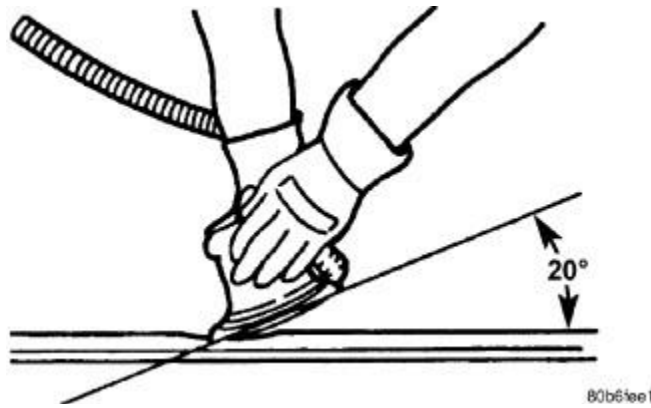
Beveling Area Around Crack At 20 Degree Angle
